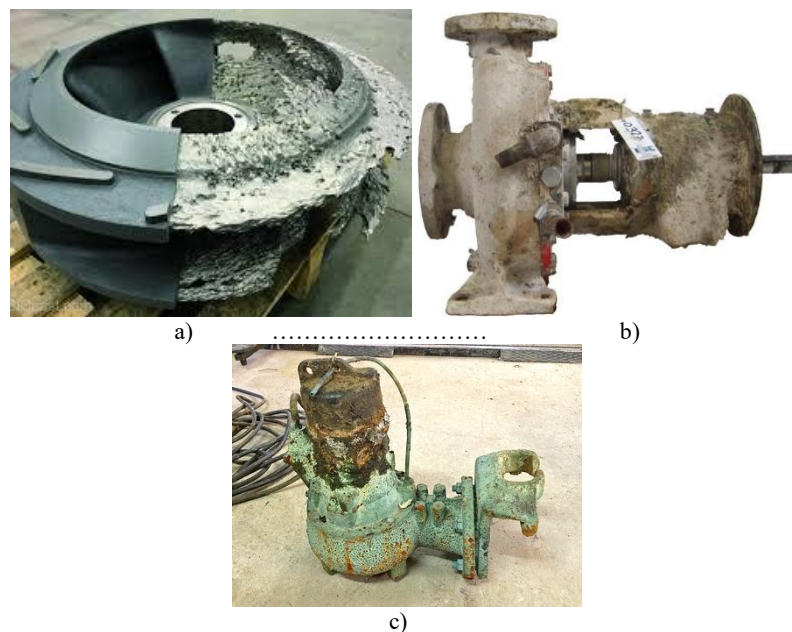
Corroded pumps: a) rotor with evidence of corrosion; b) corroded pump body; c) corroded pump.
